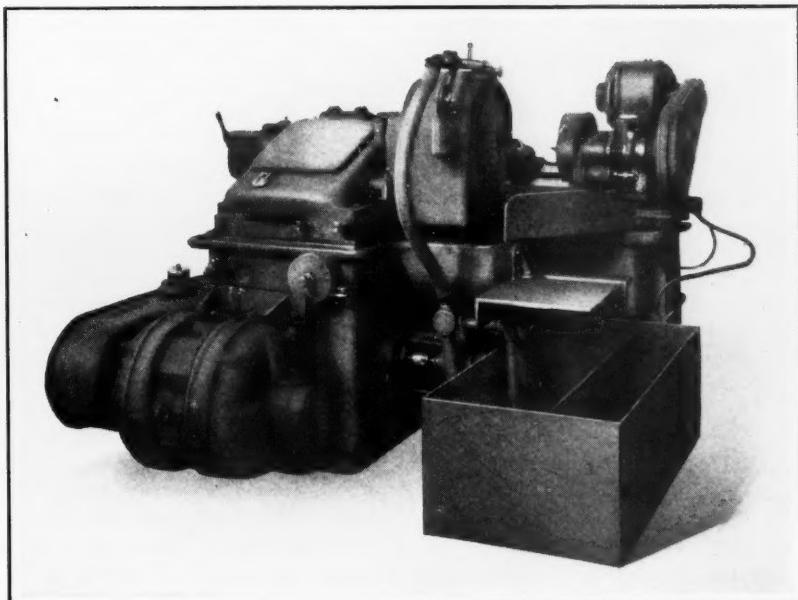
Rear View of the Semi-automatic Cylindrical Grinding Machine
